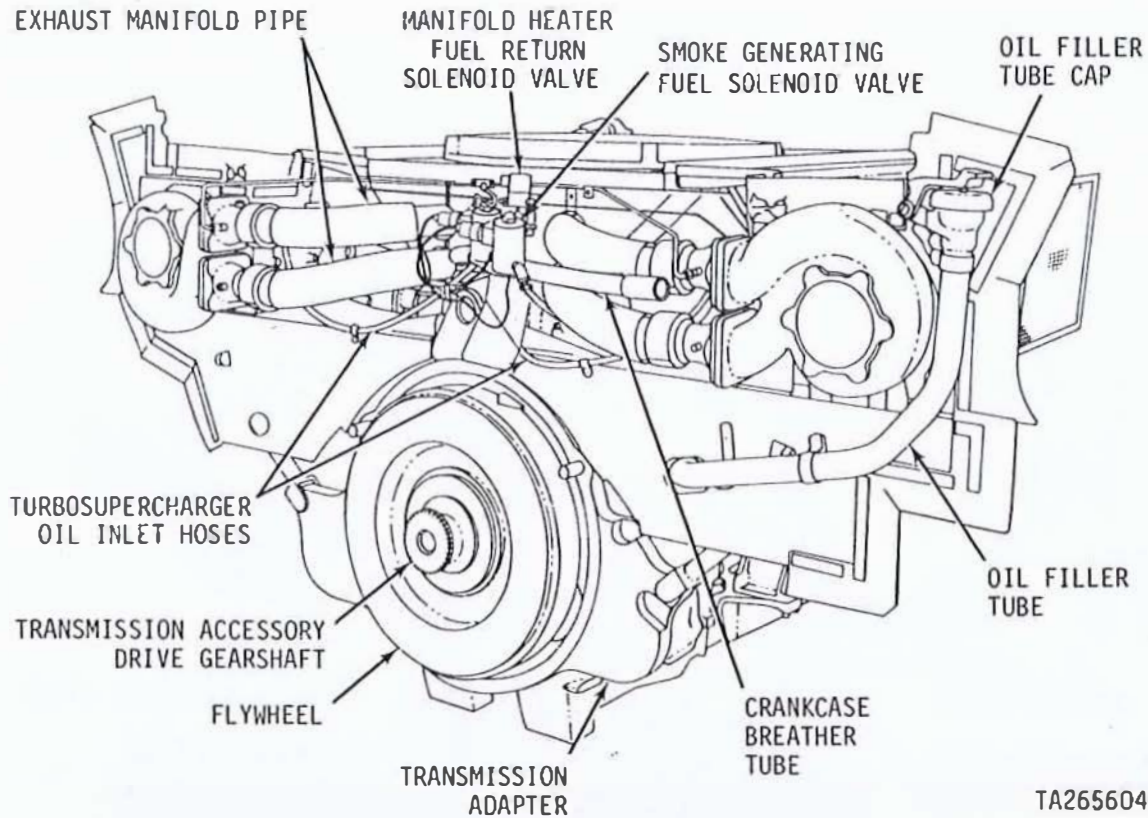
AVDS-1790-2C and AVDS-1790-2D engine assembly - rear view.
